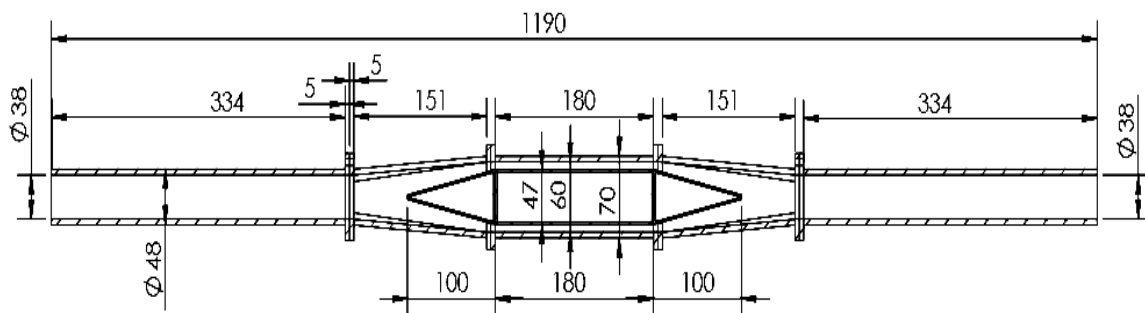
Schematic layout of exhaust heat exchanger (test section 60 × 60 × 180 mm) with cone-cylinder-cone insert (I-type).
